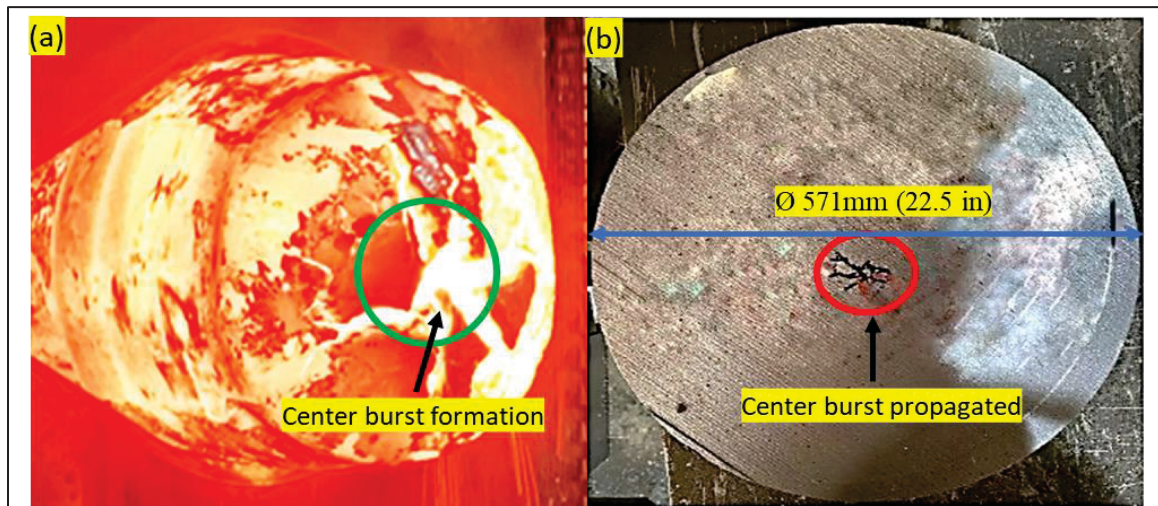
Center burst occurred during the cogging of AISI H13 steel (a) center burst formation at extreme end of the workpiece (b) center burst propagated along the center axis of the workpiece
